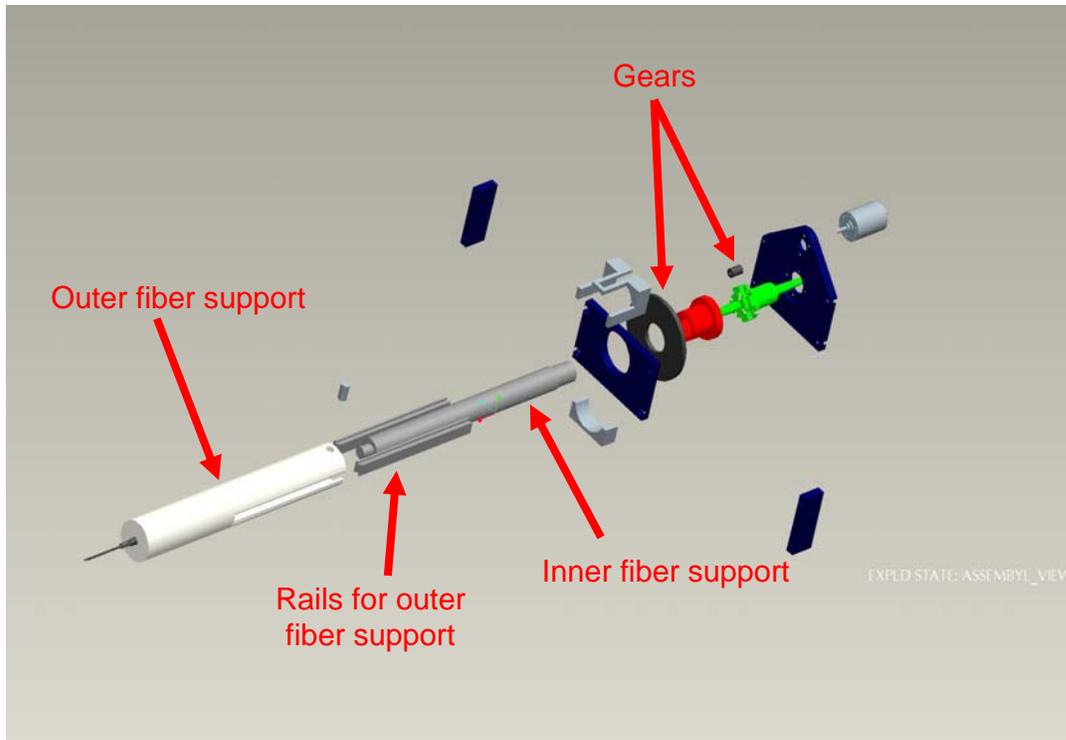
Exploded view of rotating probe. The needle, outer fiber support, inner fiber support, gearbox, fiber optic rotary joint, gear adaptor for the fiber optic rotary joint, stepper motor, and gears are shown in this image.
